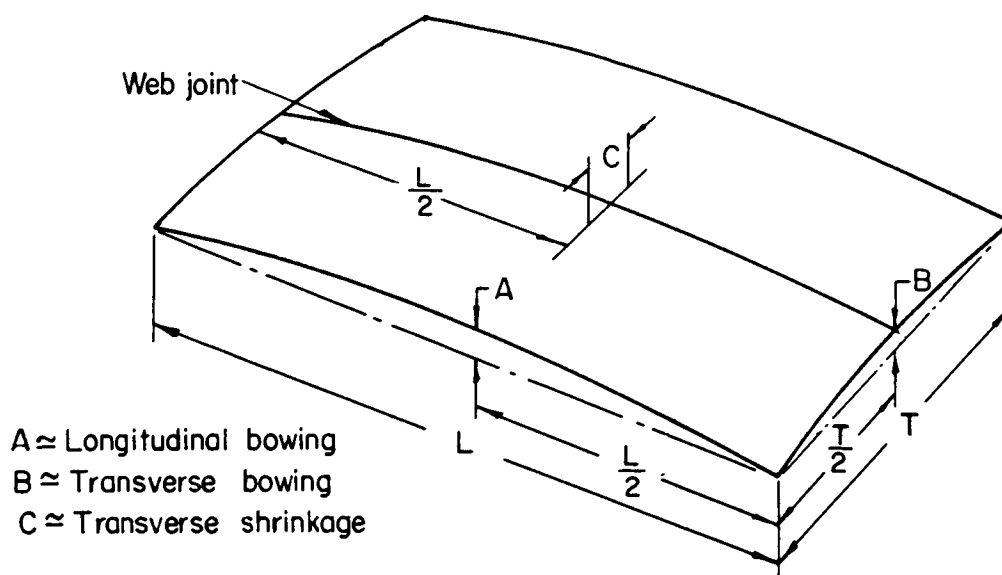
WELDMENT DISTORTION DUE TO FUSION WELDING
